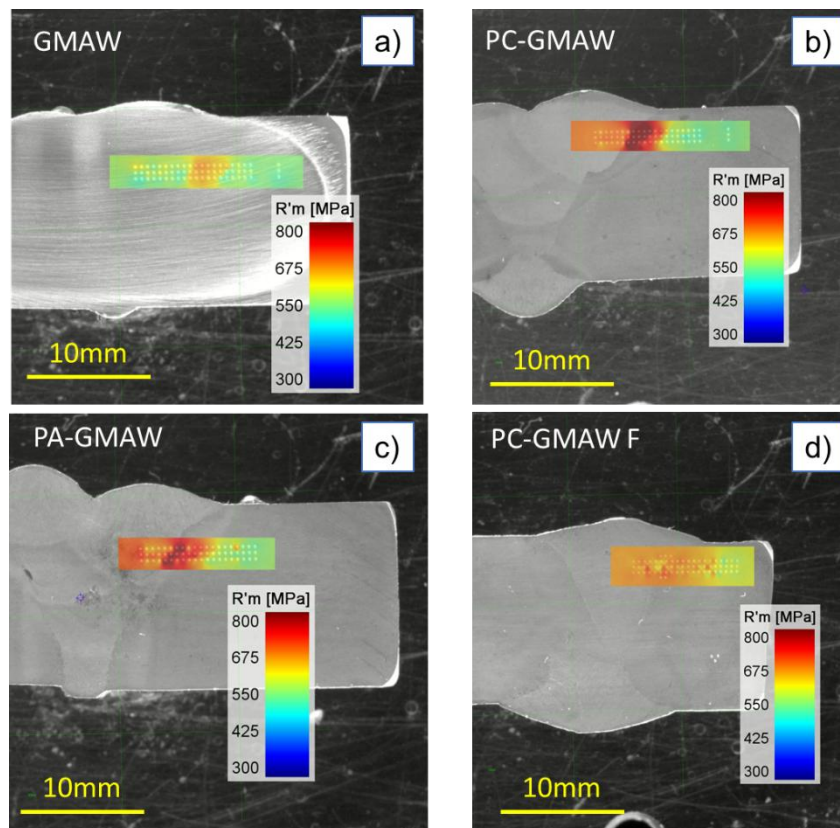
The UTS maps for welded joints of S460M steel made by different welding modes : GMAW (a), PC-GMAW (b), PA-GMAW (c), PC-GMAW -F (d).
